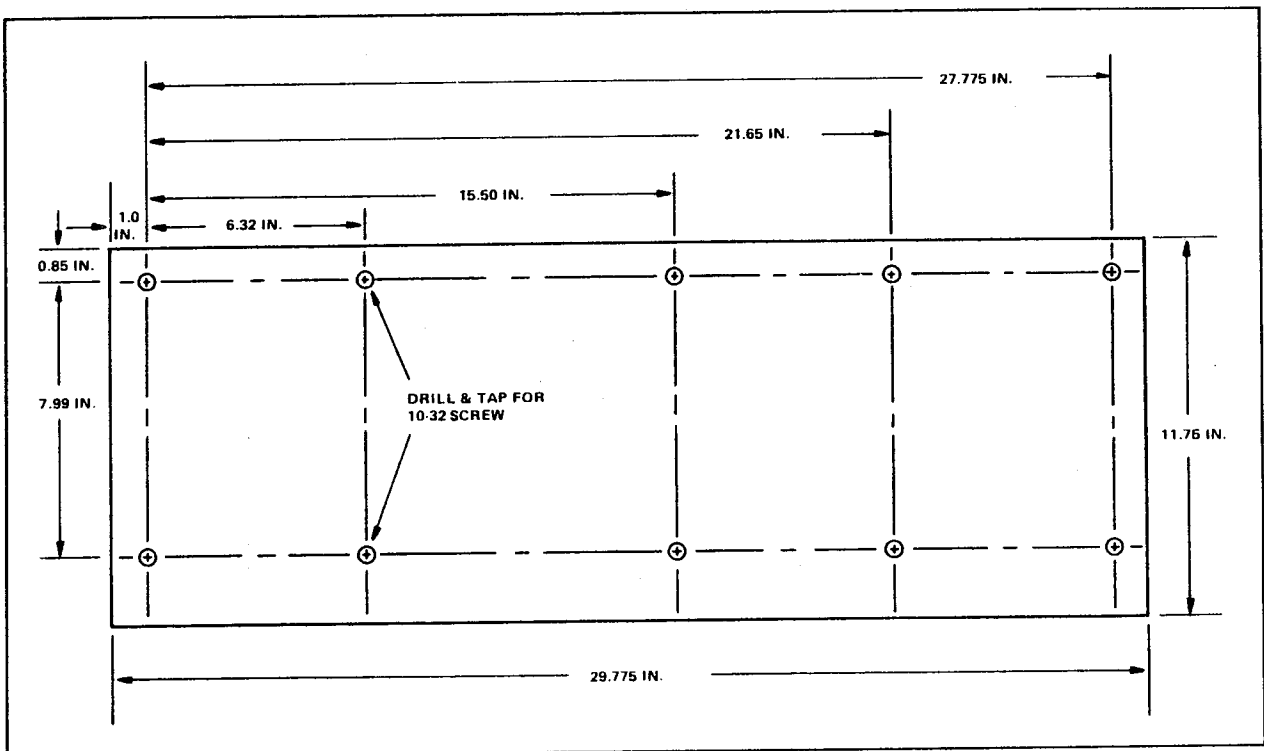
Layout Dimensions for 16-Module Rack (NLR-1016) or 17-Module Expansion Rack (NLRE-1017)
